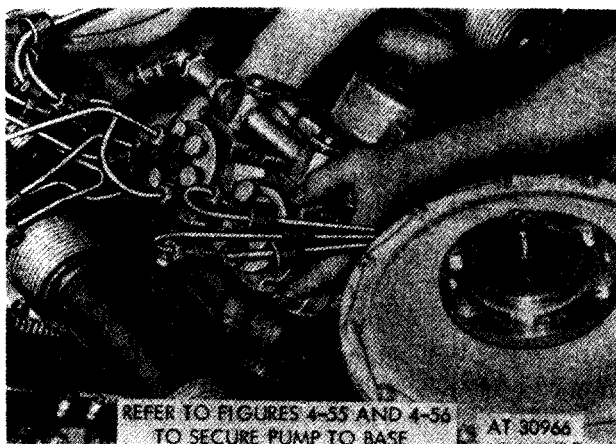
Fuel injection pump diaphragm coupler and pilot ring on hub before pump installation.
